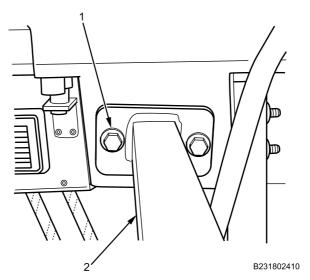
Left Side Gunner Platform Stand Mounting Bolts.
